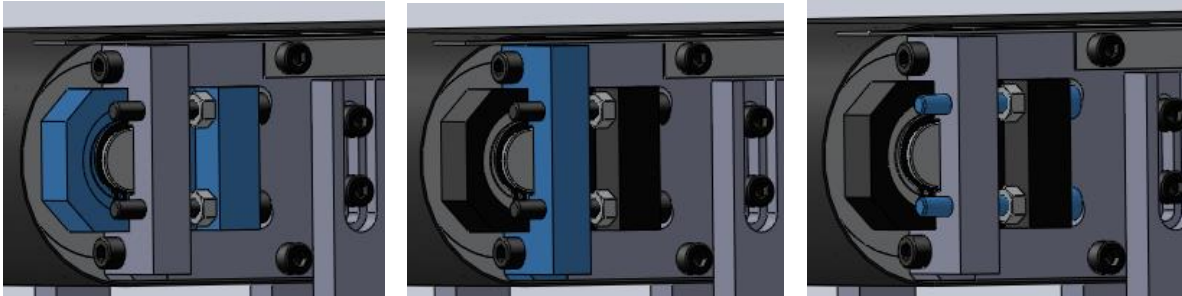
Components used for tensioning the belt, highlighted in blue
